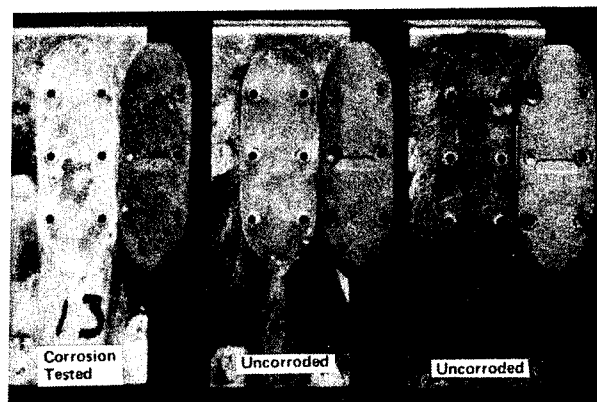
Bonding interfaces of "wet rivet" samples after LTRI 200,000-ampere lightning tests with no resultant damage
